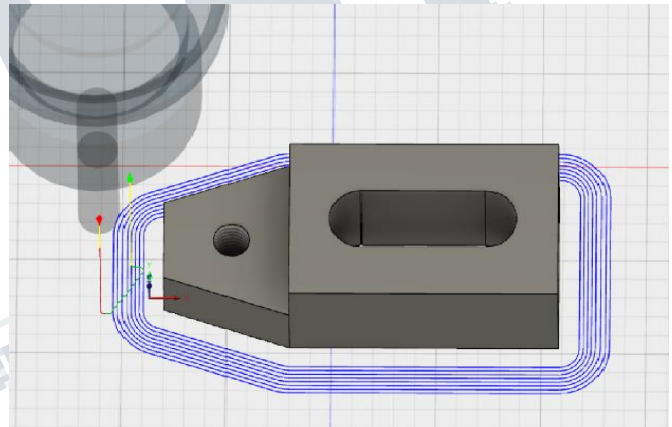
Stock piece used for manufacturing and Tool path for pocket cutting
